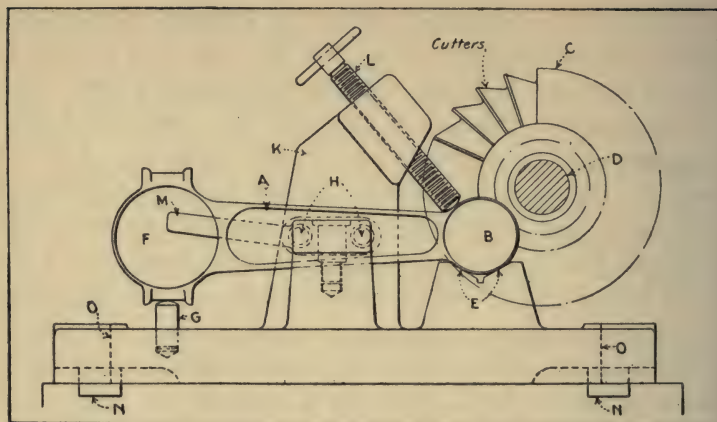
SIMPLE STRADDLE-MILLING FIXTURE FOR A CONNECTING ROD
